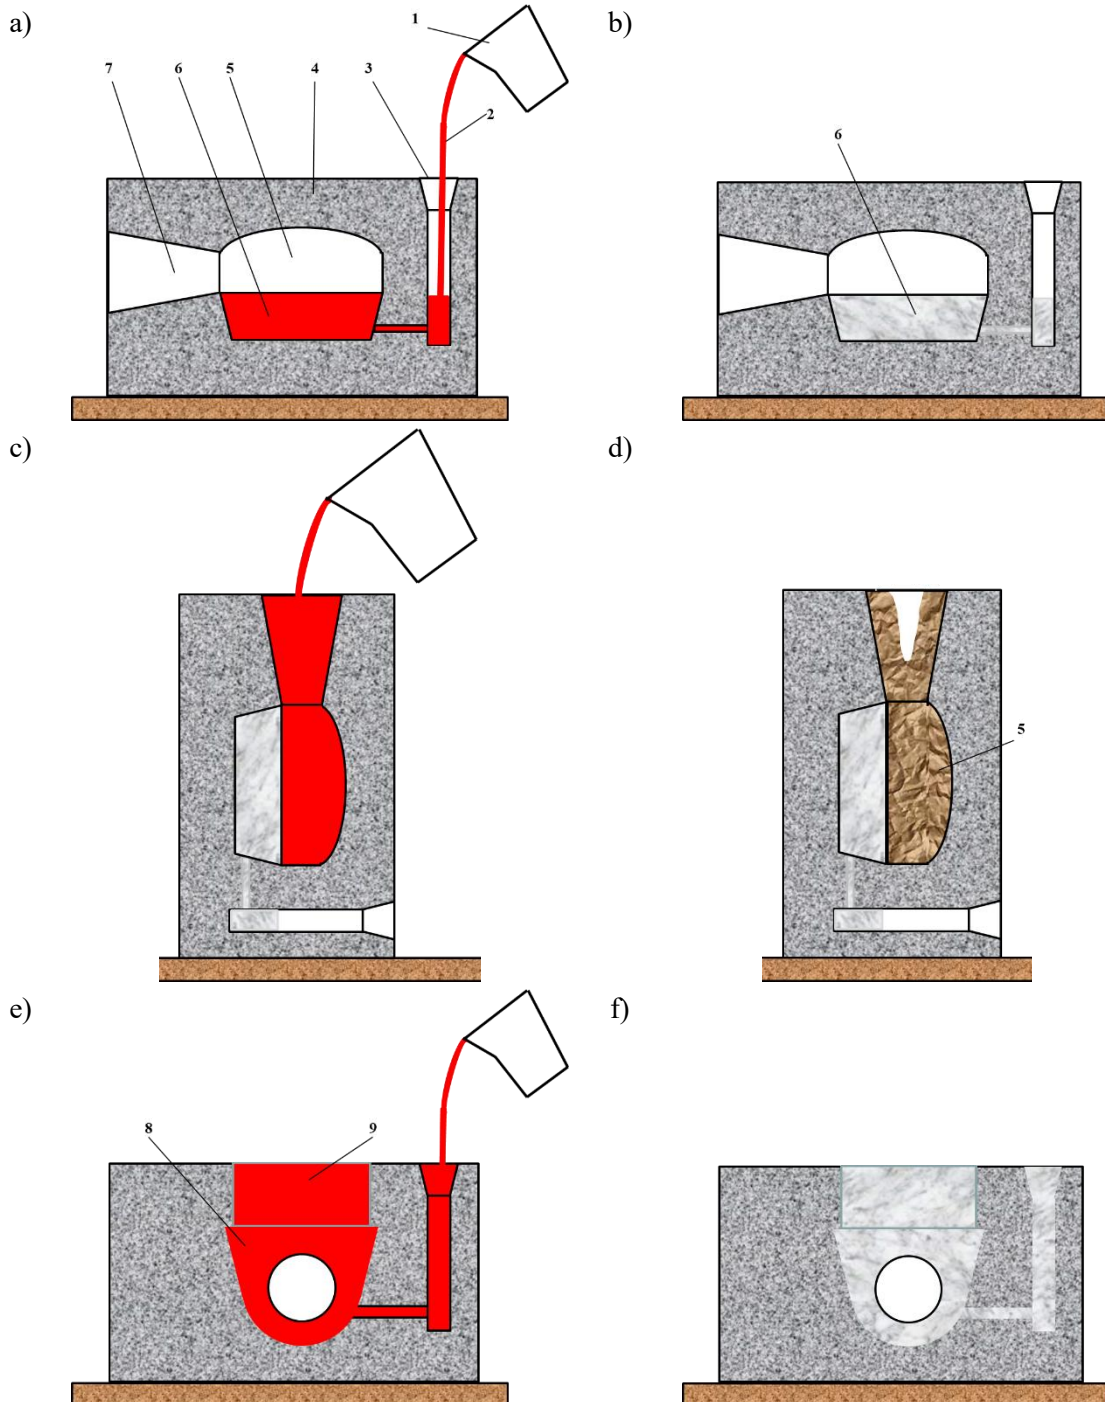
Manufacturing technology of the bimetallic cast-welded construction components:
